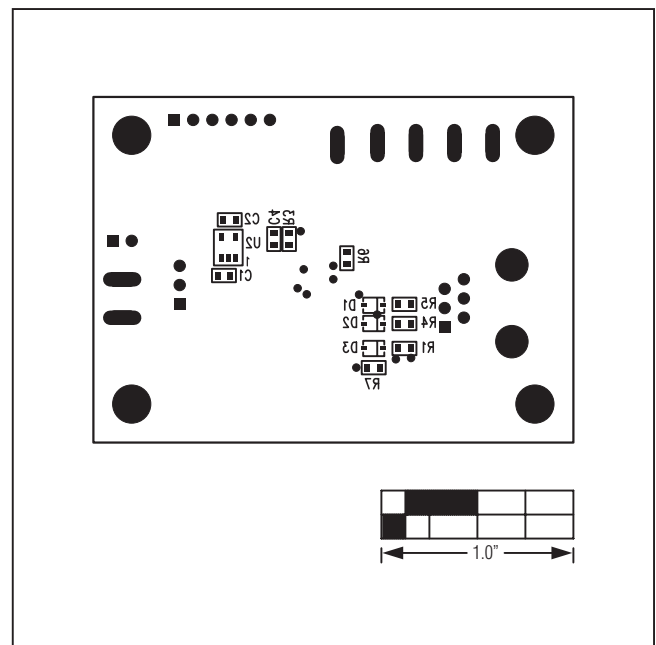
MAX17048X/MAX17049X EV Kits Component Placement Guide—Solder Side
